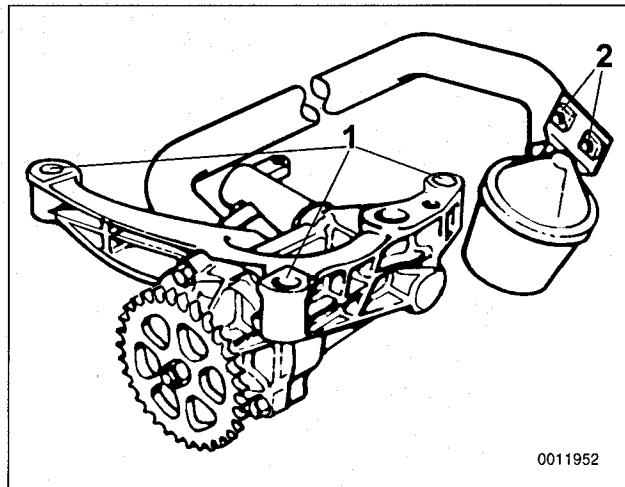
Oil pump mounting points (1) and pickup tube mounting points (2).
